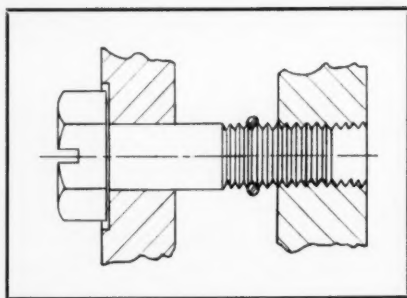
In this design, a hexagon head cap screw is used for the latch.
